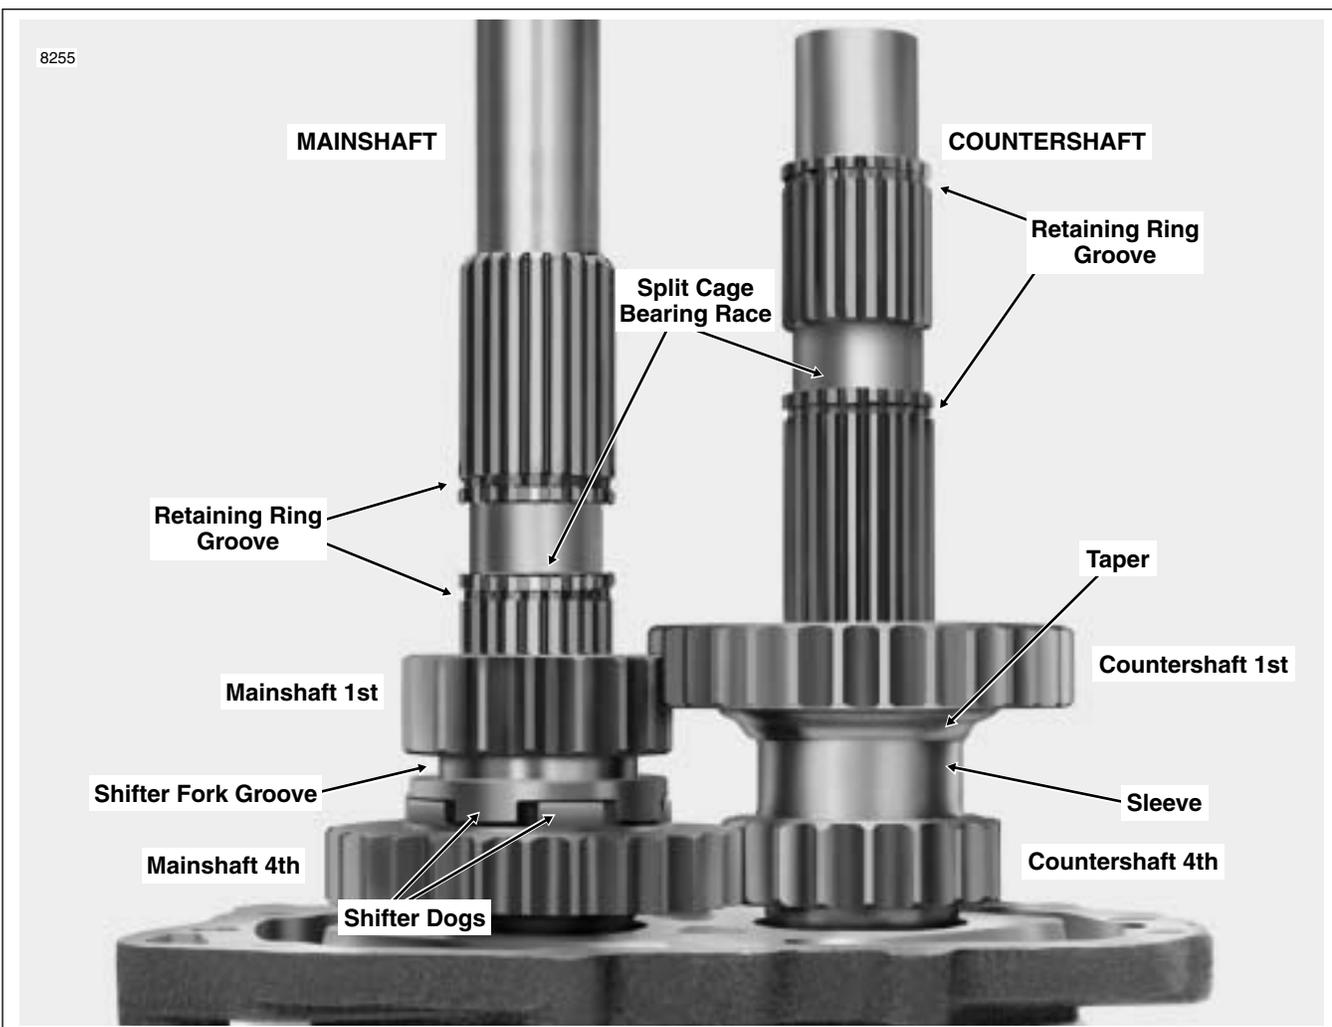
Install Mainshaft and Countershaft 1st and 4th Gears
